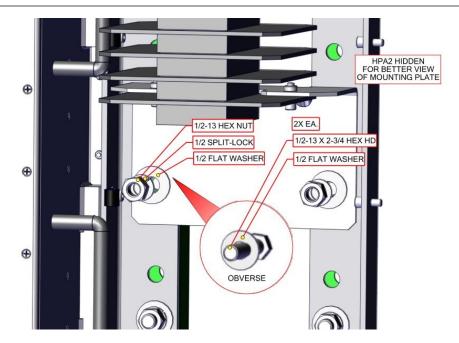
Mounting Switch Support to Frame, Bottom, S-Band (typical)
